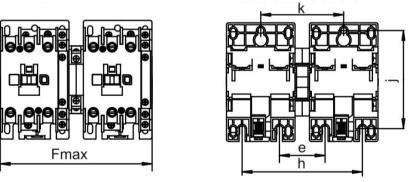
TGC1s-40N~95N outline and installation dimensions drawings
